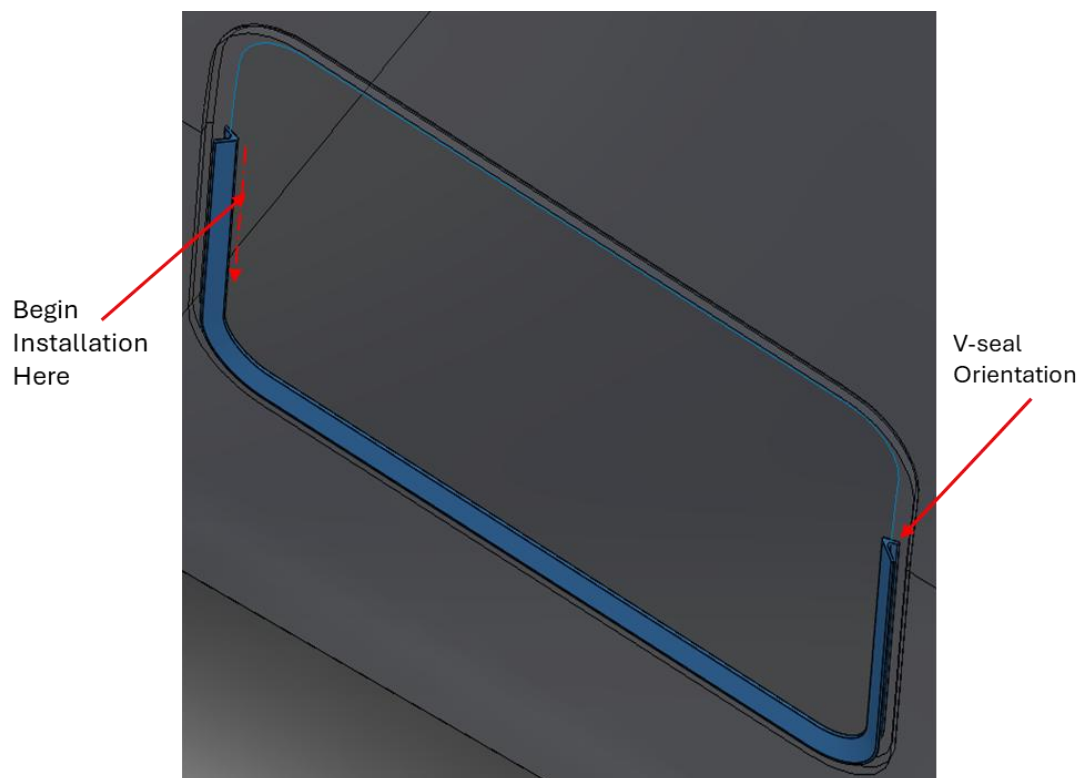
V-Seal Installation on Luggage Door Frame, showing V-profile orientation
